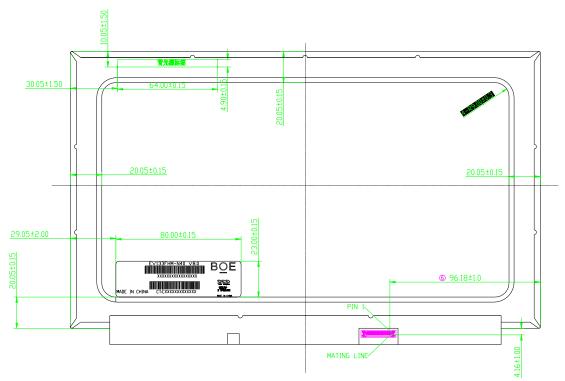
TFT-LCD Module Outline Dimensions (Rear view)
